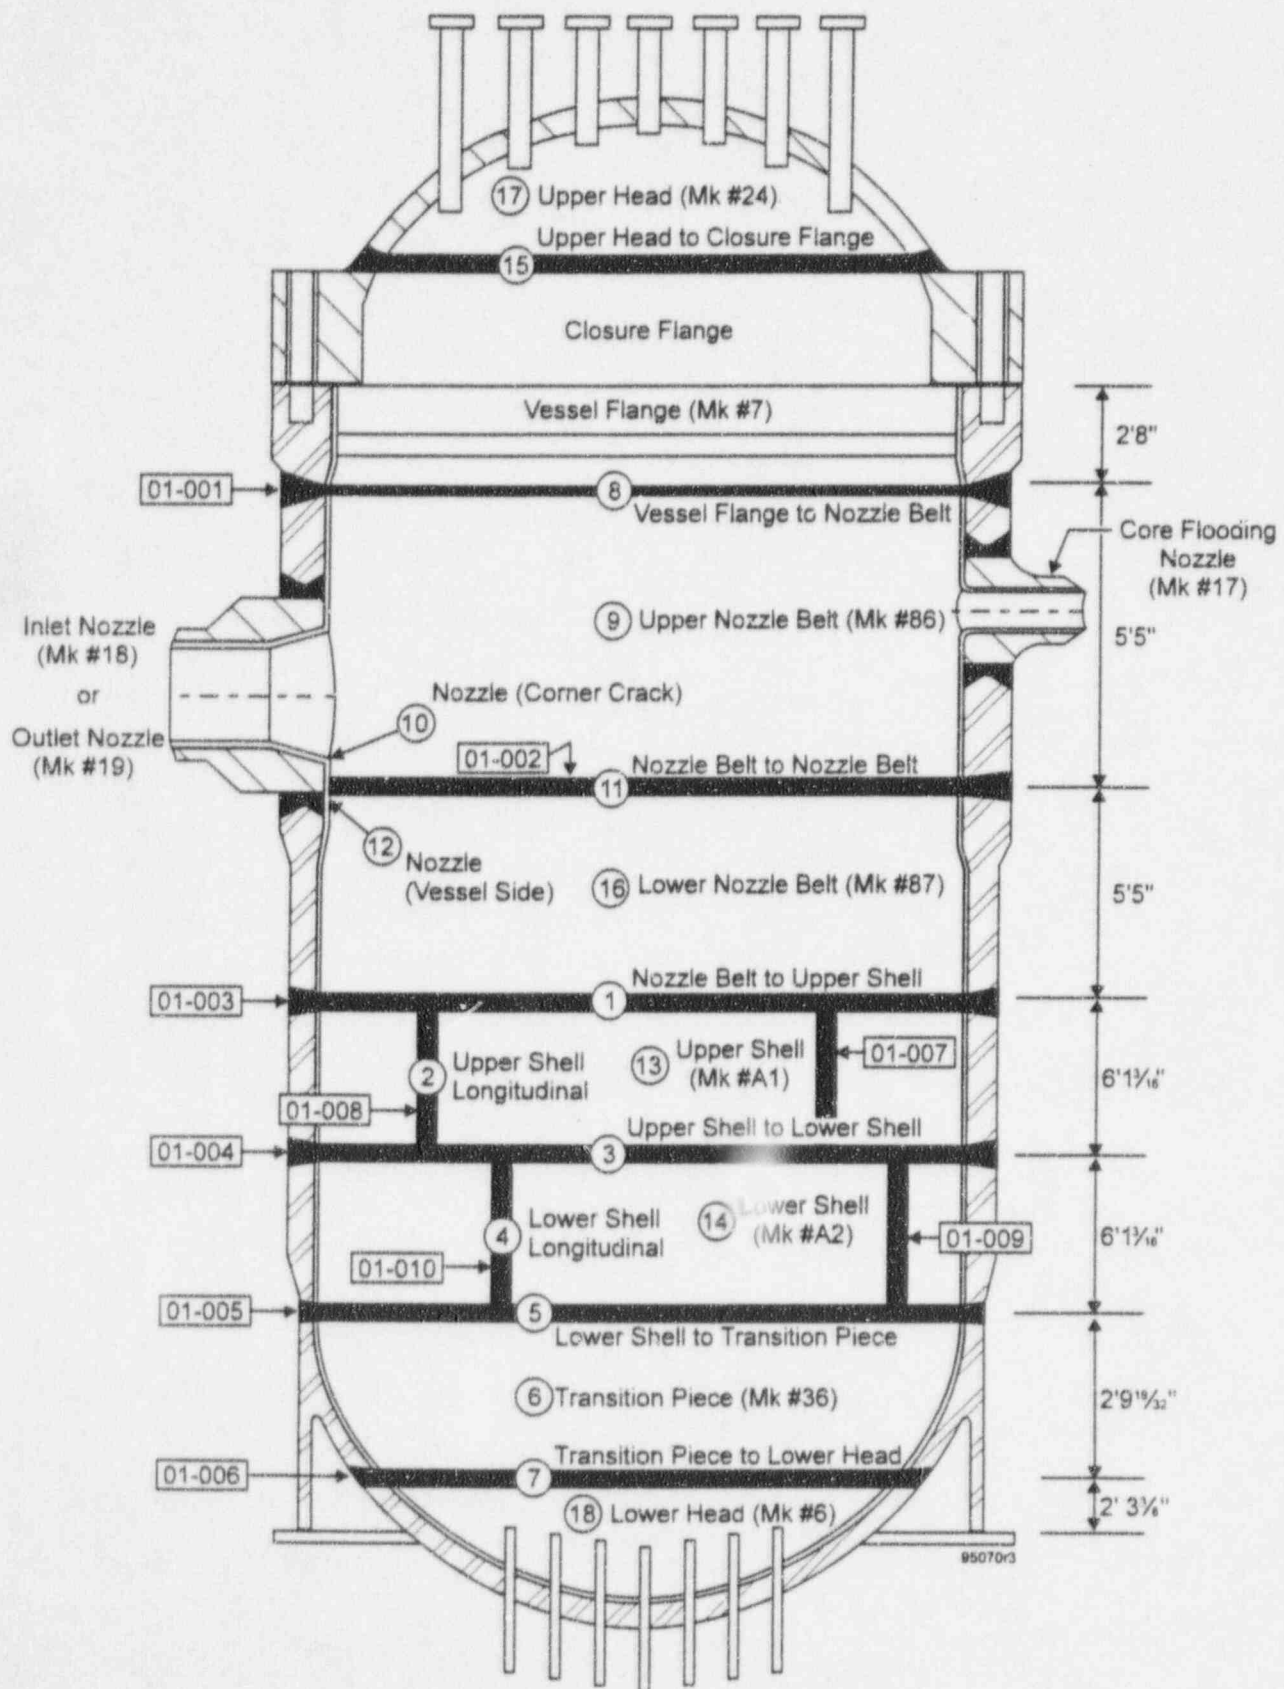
Plates and Weld Locations of ANO-1 Vessel
